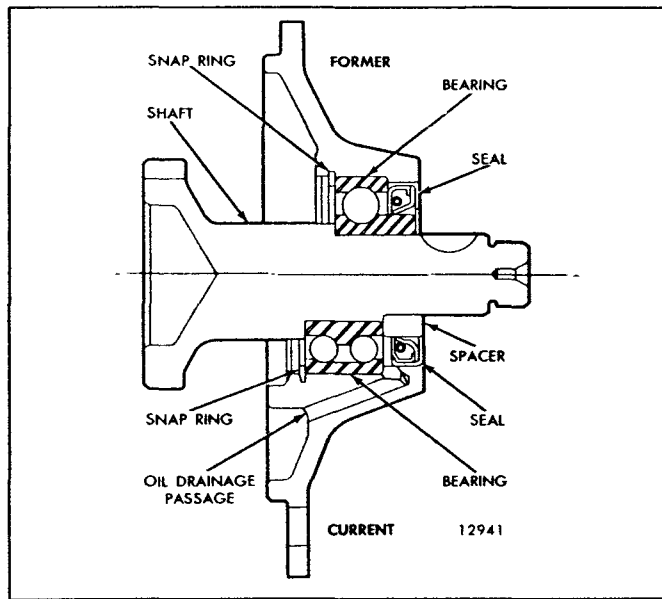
Former and Current Drive Plate Type Accessory Drive
